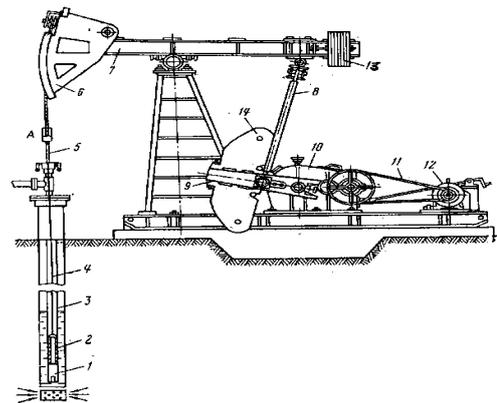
Sucker-rod pump assembly with conventional pumping unit: 1 – sucker-rod pump; 2 – plunger; 3 – sucker-rod string; 4 – string; 5 – wellhead stem; 6 – horsehead; 7 – beam; 8 – rocker; 9 – crank; 10 – reducer; 11 – V-belt drive; 12 – electric motor; 13 – counterbalance; 14 – crank counterbalance.
